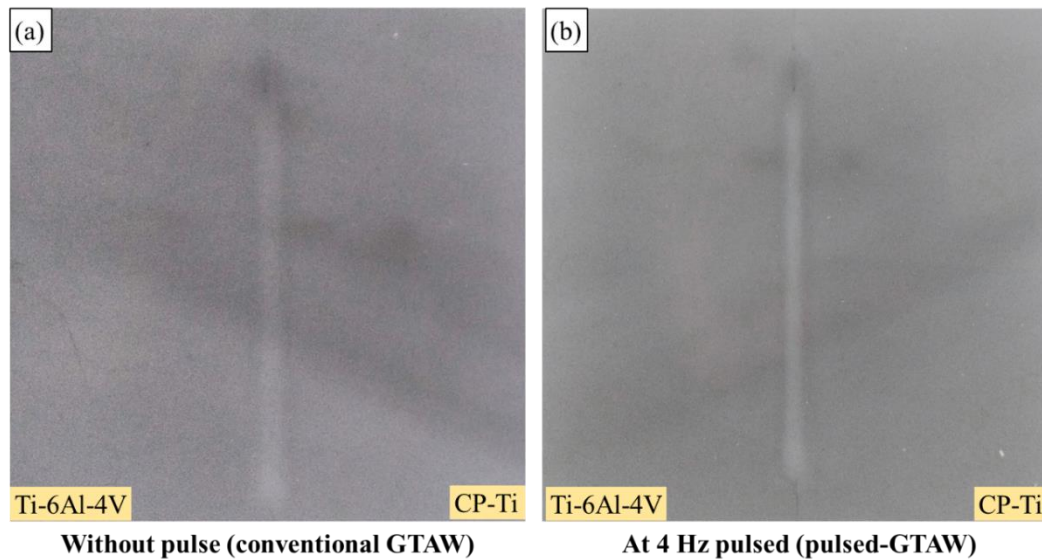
X-ray radiographic film of dissimilar (CP-Ti/Ti-6Al-4V) welded sheets: (a) using conventional-GTAW; (b) using p-GTAW at 4 Hz
